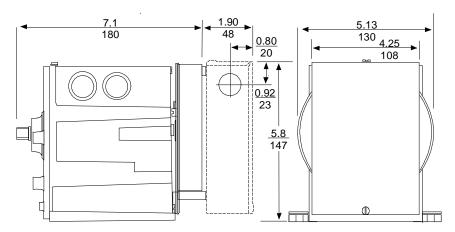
Spring Return with Switch Kit Dimensions, in./mm
